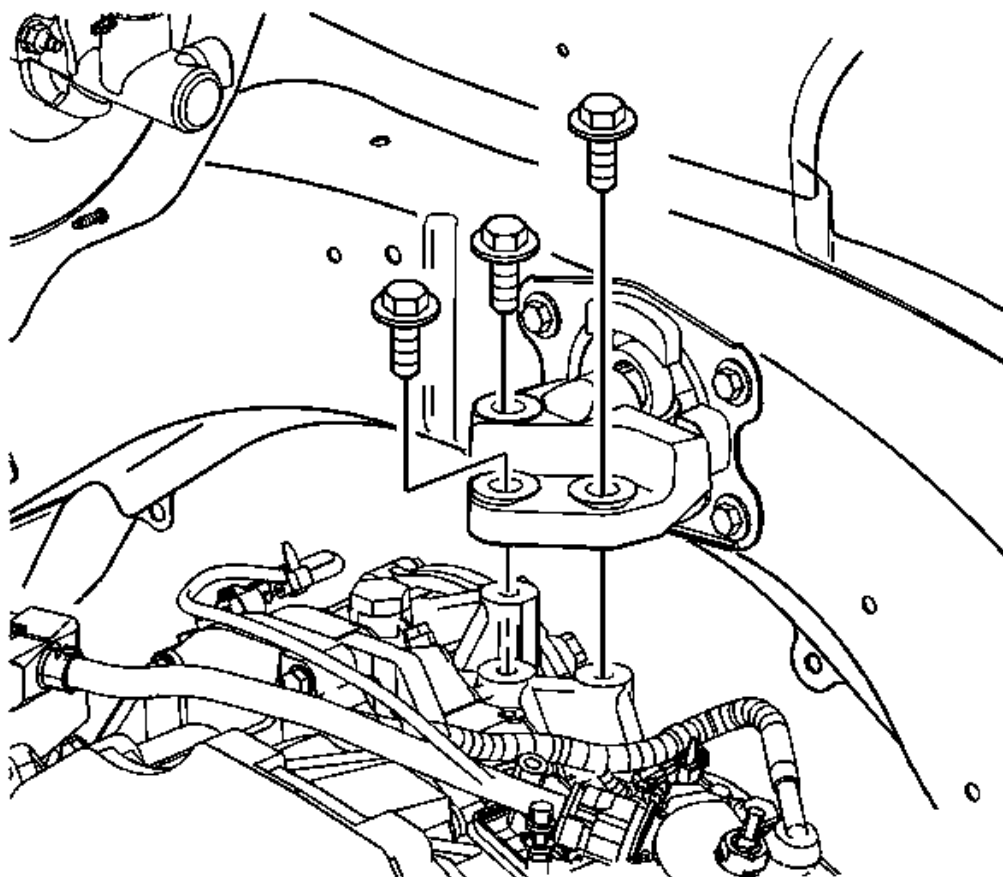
Identifying Front Differential Carrier Assembly Torque Sequence
